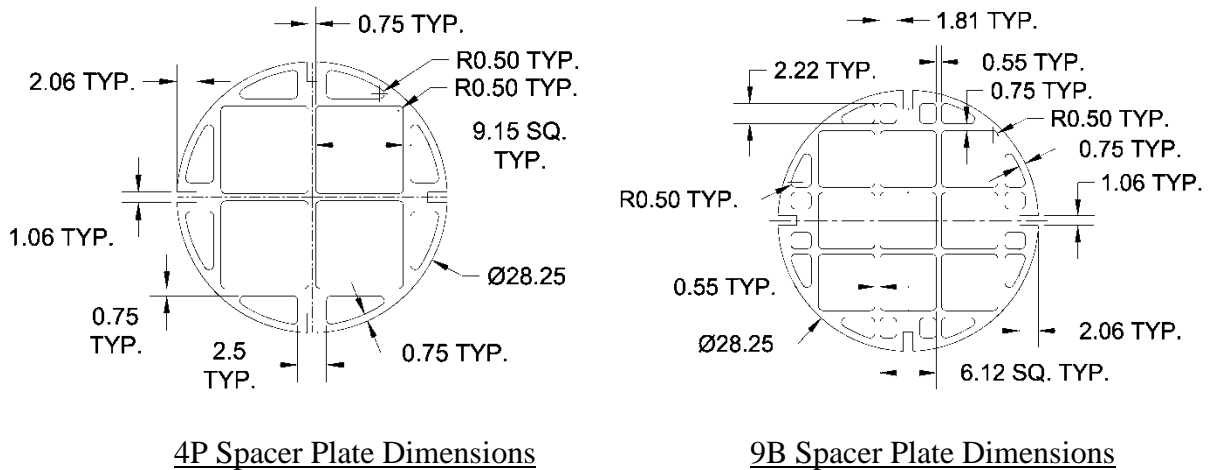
4P and 9B Spacer Plate Dimensions
